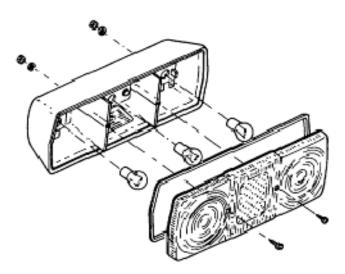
Stop/Tail, Reversing and Indicator Light Exploded View
